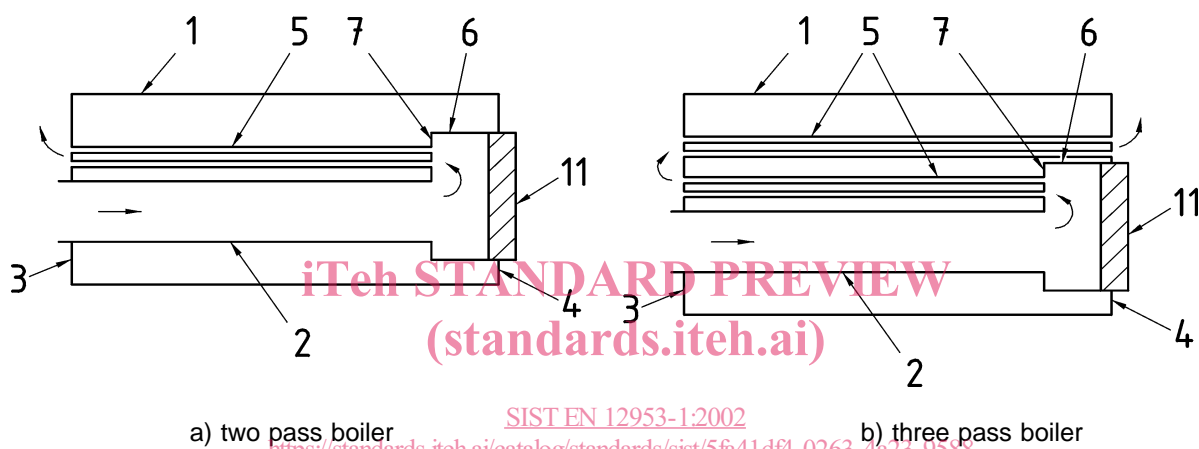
Wet back boiler with internal reversal chamber
